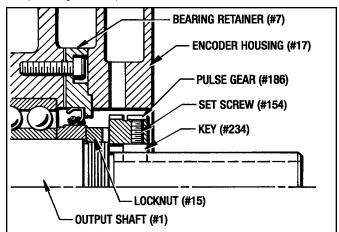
Pulse Gear Alignment (#03 & #05 Posidyne)
